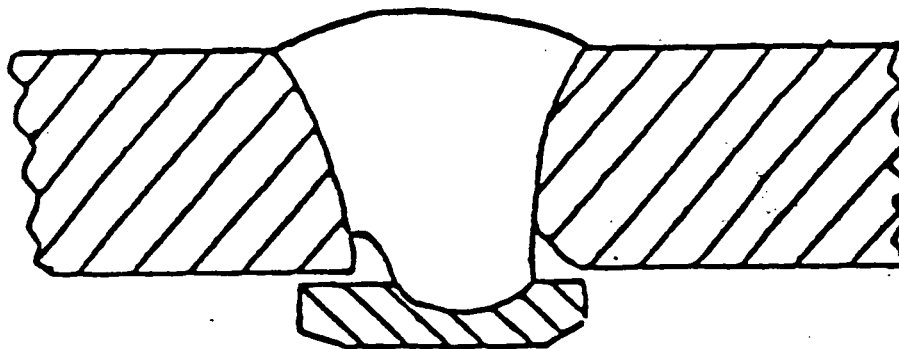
UNACCEPTABLE WELD JOINT
